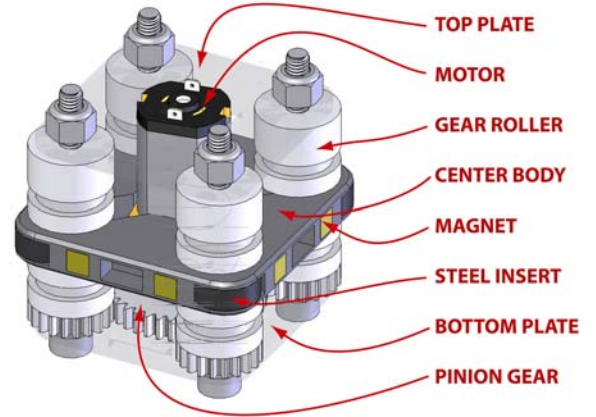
Illustration showing the component parts of a single module with belt removed.
